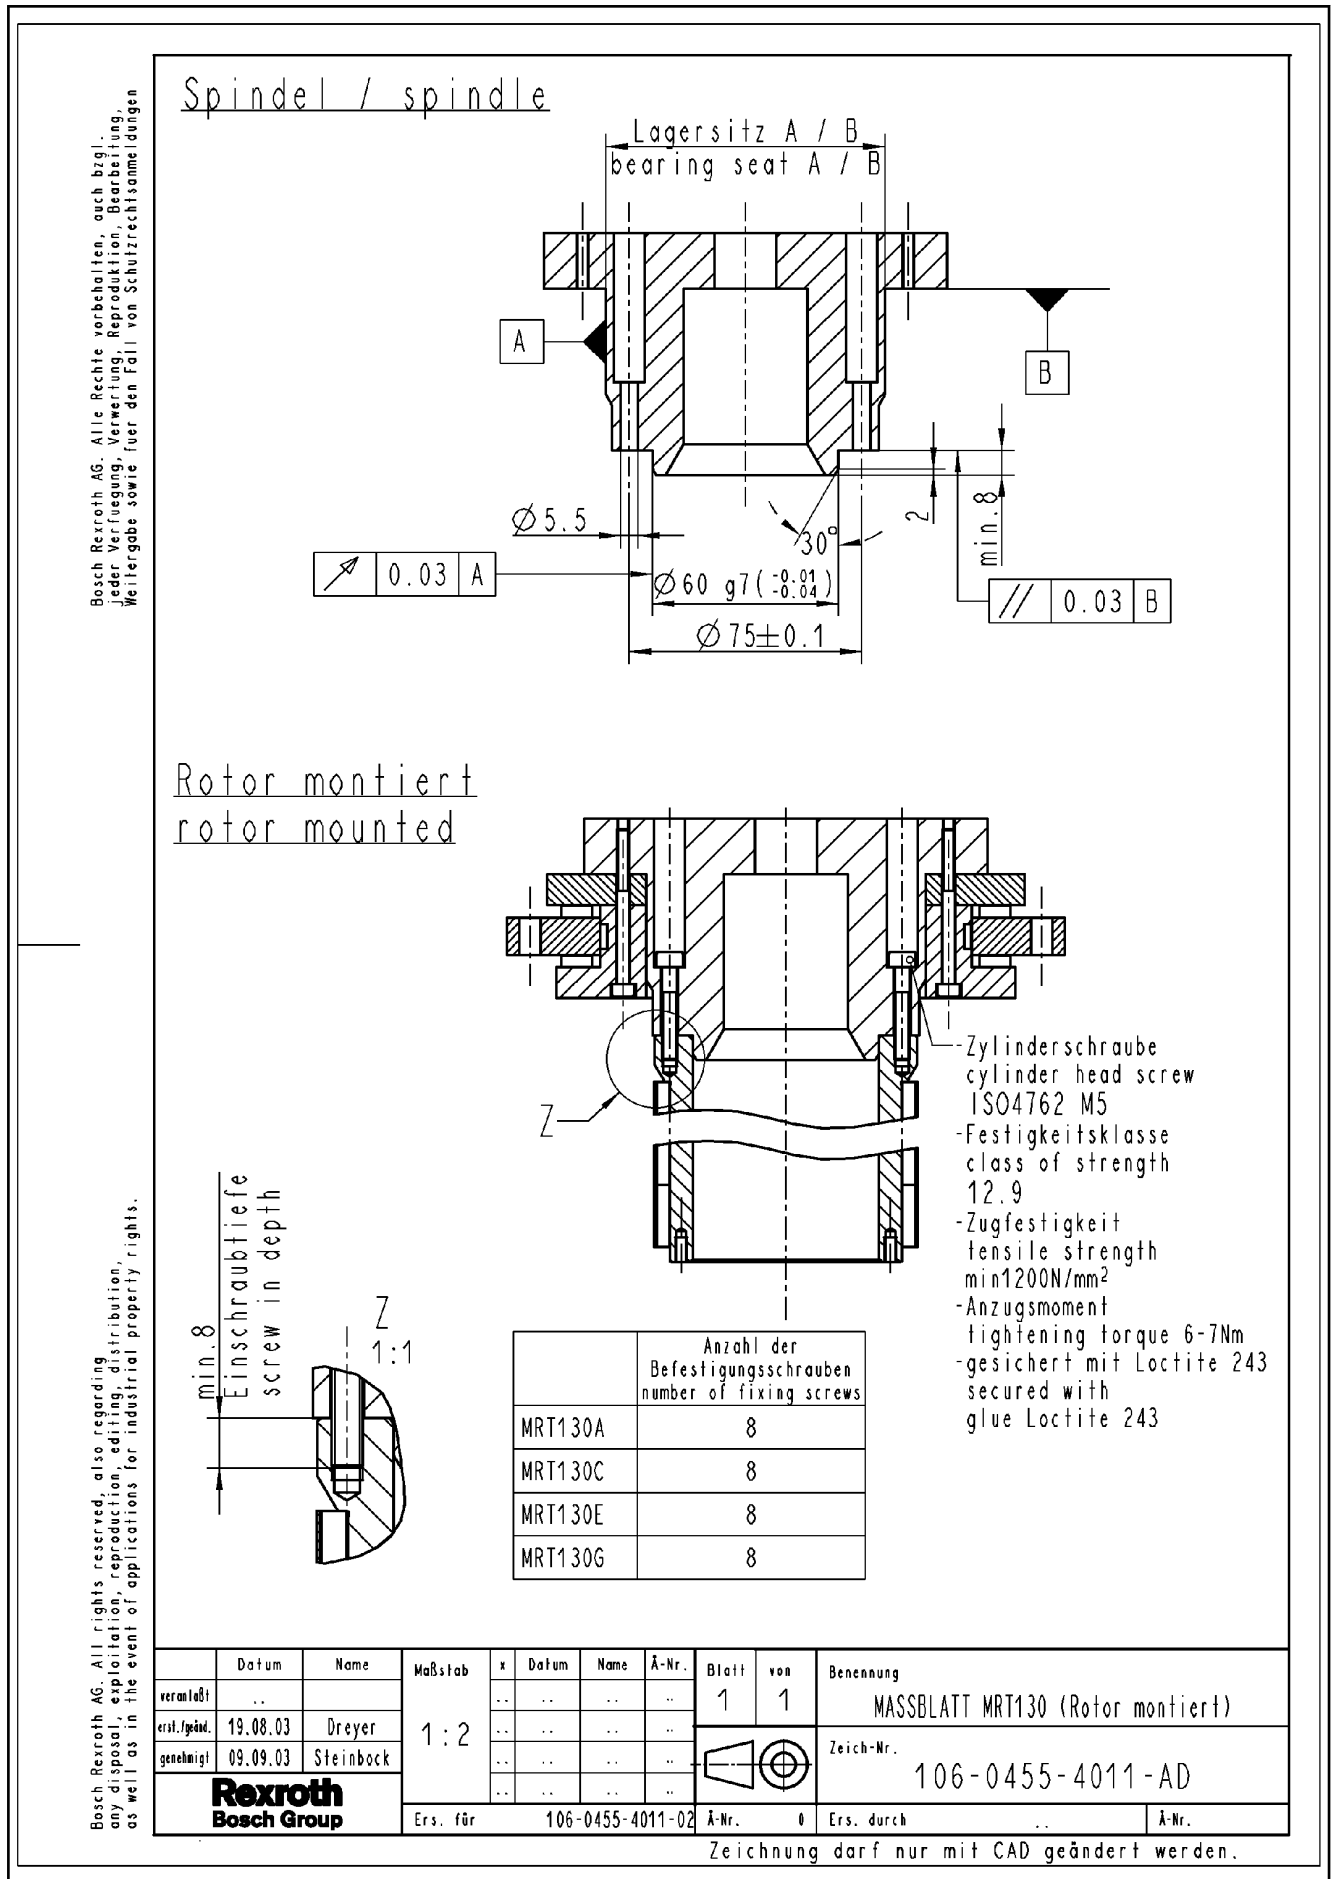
Dimension sheet for rotor MRT130, mounted
